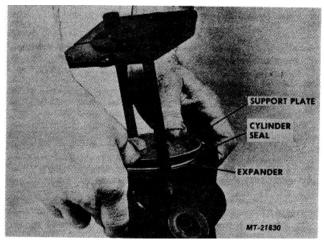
Removal of Support Plate, Cylinder Seal and Expander
